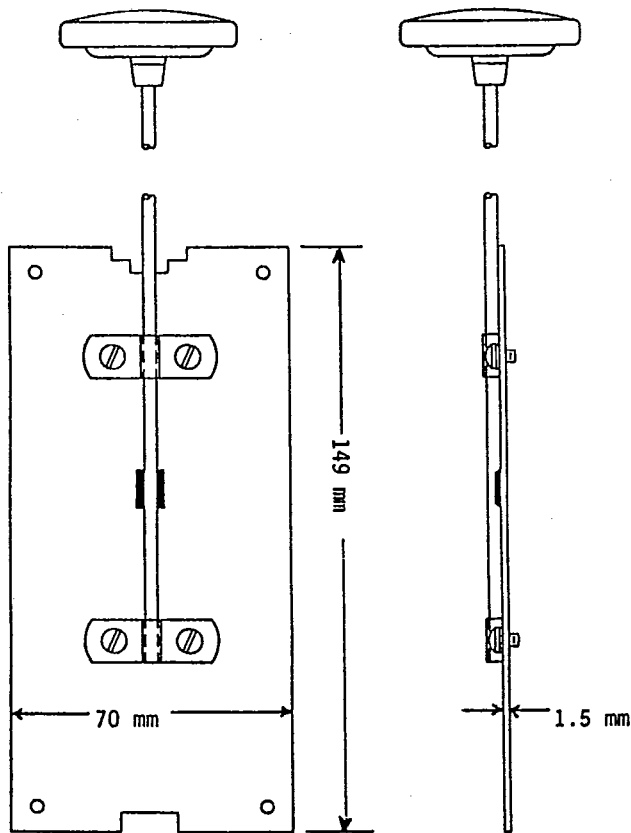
Black Panel Thermometer Unit Using Dial Type Thermometer
